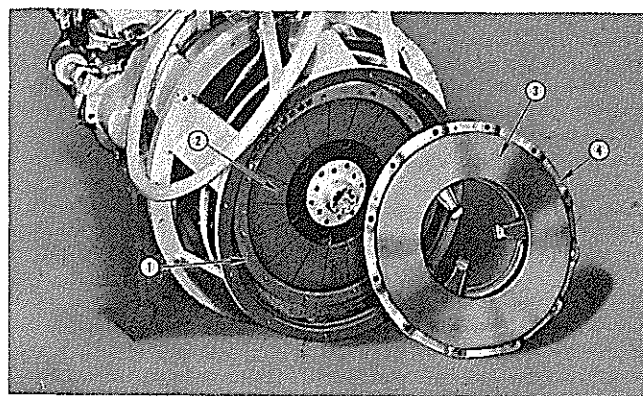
COVER AND PRESSURE PLATE REMOVED
